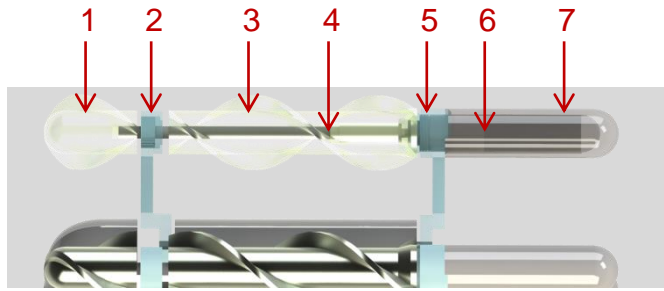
Motor arrangement for the screw actuation motor in Quad Screw Device Version 3. Annotations show: 1) Front-section screw; 2) Front controllable arm section; 3) Mid-section screw; 4) Transmission shaft; 5) rear controllable arm section; 6) Screw motor; 7) Screw motor housing pod.
